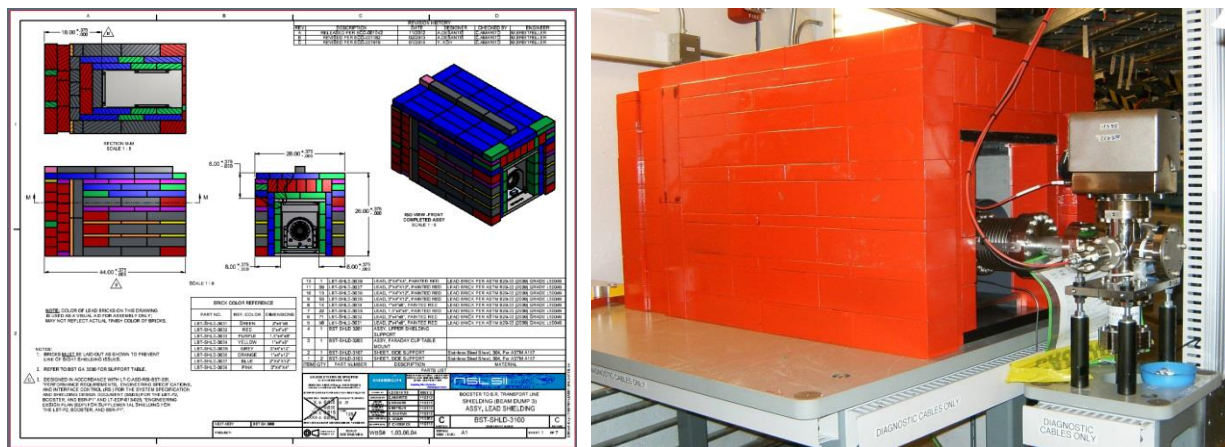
Lead assembly drawing for Booster Beam Dump and finished assembly of lead bricks.
